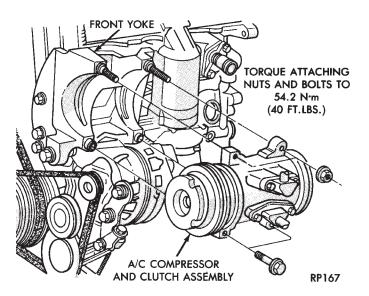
A/C Compressor Removal and Installation—2.5 L Engines
